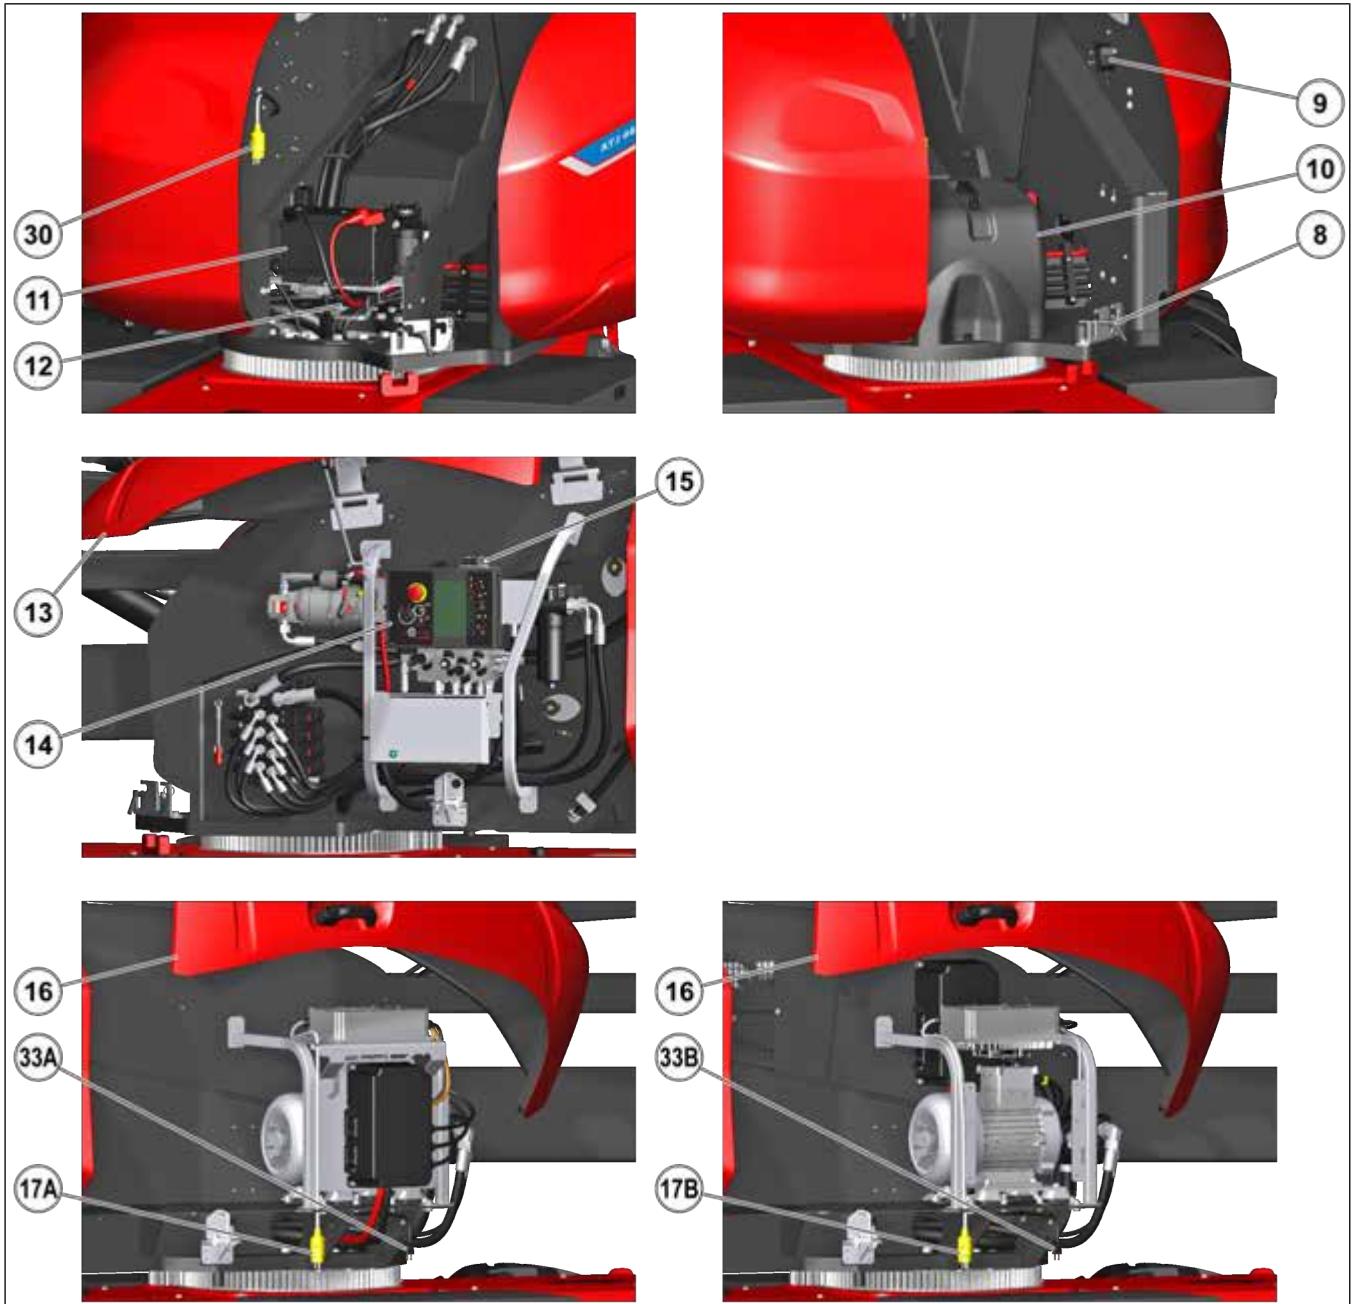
Location of the machine components 2 - ATJ 46 E S1
